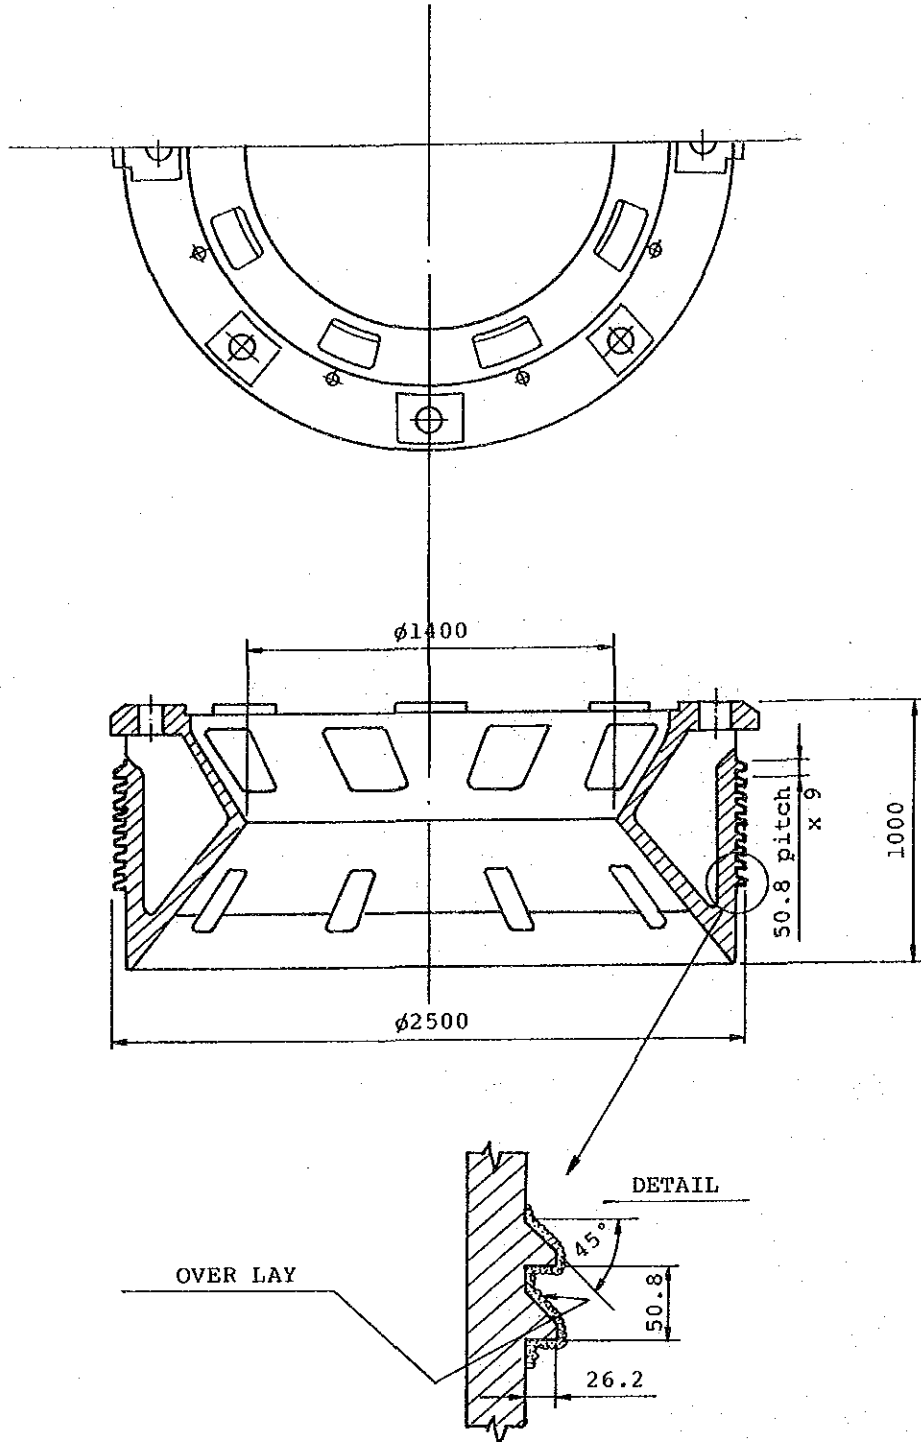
(2/5) Representative part requiring overlay welding—Bowl
